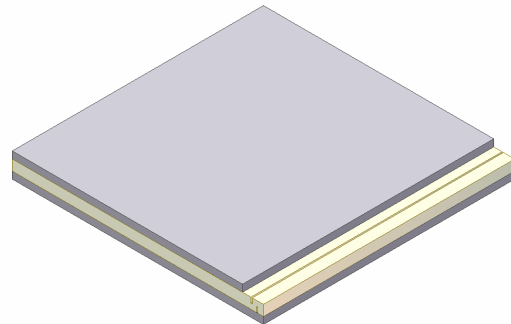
Shear Specimen Preparation – Insulation Inverted; Second Notch Machined
